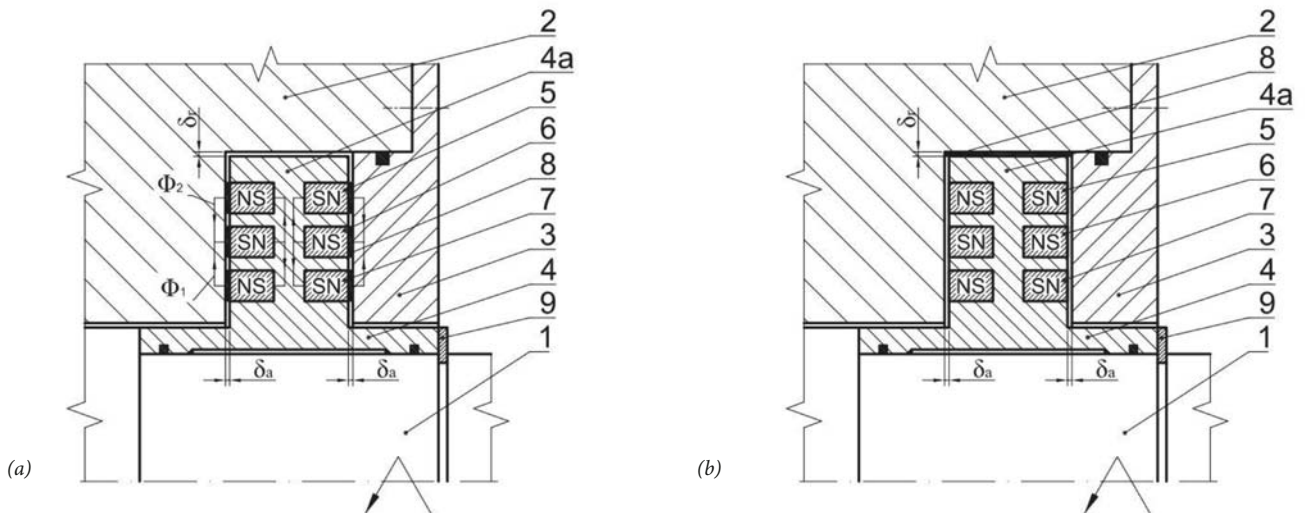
Centrifugal seal with magnetic fluid for rotating shaft and movable magnetic system (a) position of magnetic fluid at low rotating speed, (b) position of magnetic fluid at high rotating speed 1 - shaft, 2 - housing, 3 - cover, 4 - flanged sleeve, 4a - flange, 5, 6, 7 - annular permanent magnets, 8 - magnetic fluid, 9 - snap ring, δ_a - axial sealing gap, δ_r - radial sealing gap, Φ_1 , Φ_2 - closed magnetic circuits
